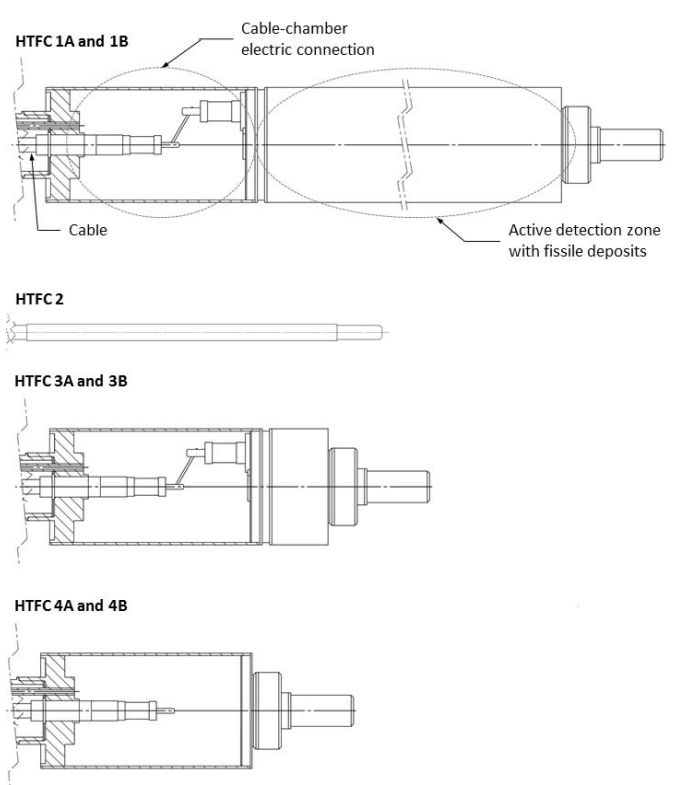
Drawings of HTFCs manufactured by PHOTONIS and used in this paper.
